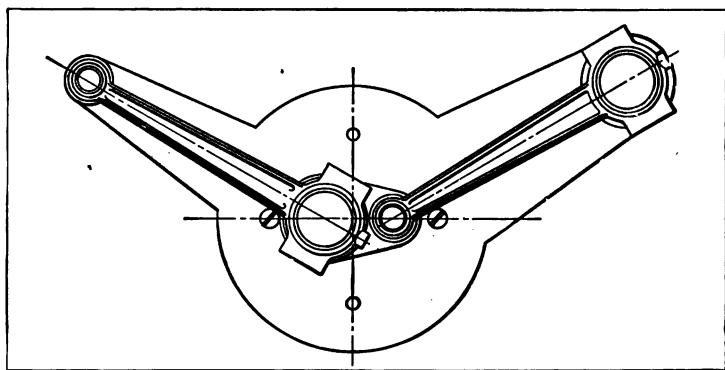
Engine Connecting-rods, and Fixture for Broaching
